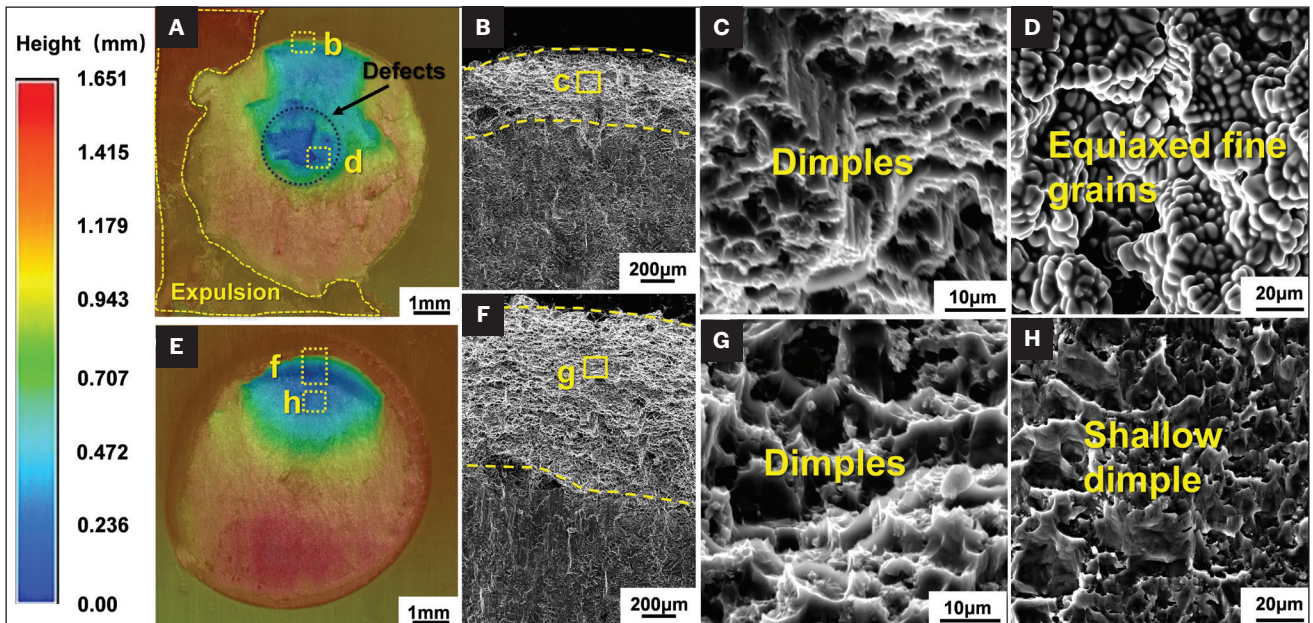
Processes 1 and 2 fracture morphology: A – Macroscopic fracture morphology of Process 1; B – magnified view of region b marked in Fig. A; C – magnified view of region c marked in Fig. B; D – magnified view of region d marked in Fig. A; E – macroscopic fracture morphology of Process 2; F – magnified view of region f marked in Fig. E; G – magnified view of region g marked in Fig. F; H – magnified view of region h marked in Fig. E.
